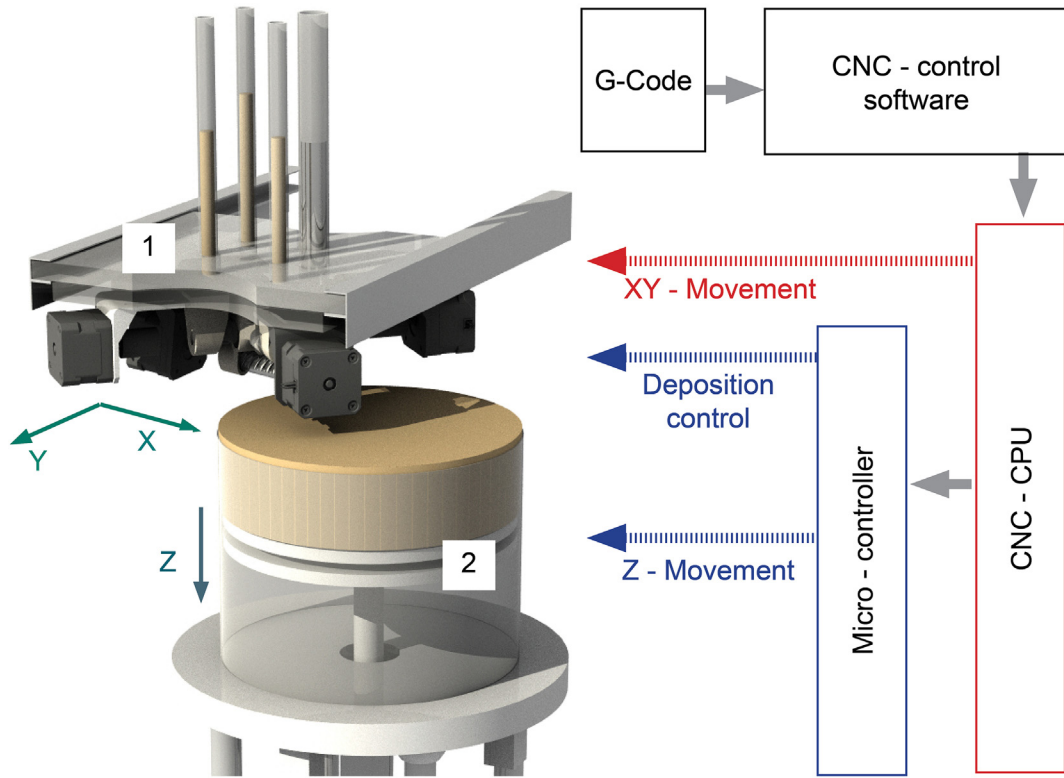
Mechanical assembly of the 3D printer and the CNC-control scheme, where 1 - print head, 2 - print bed.
